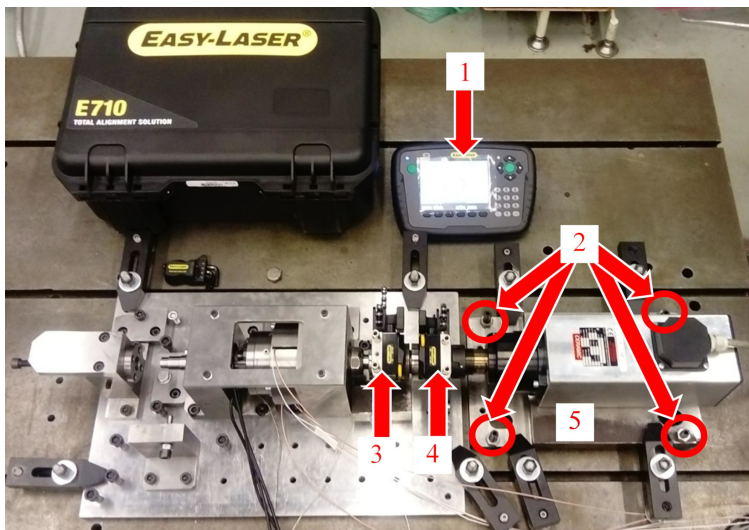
View of test stand during alignment: 1 – operator panel, 2 – adjusting screws, 3 – measuring unit S, 4 – measuring unit M, 5 – high-speed motor with base plate
